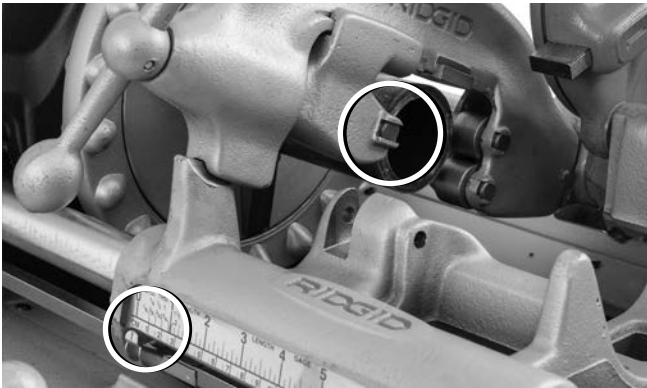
A – Cutter Wheel Blade Against End of Pipe. Set Pointer to Zero (0)
